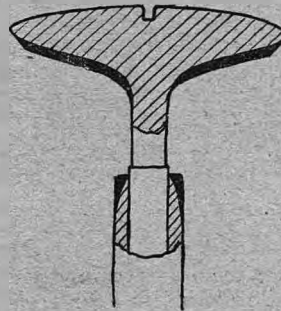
Sketch showing how the outline of an inlet valve may be improved and brought nearer to streamline shape. The top of the valve guide has also been rounded off. The solid black portions represent the metal cut away.
